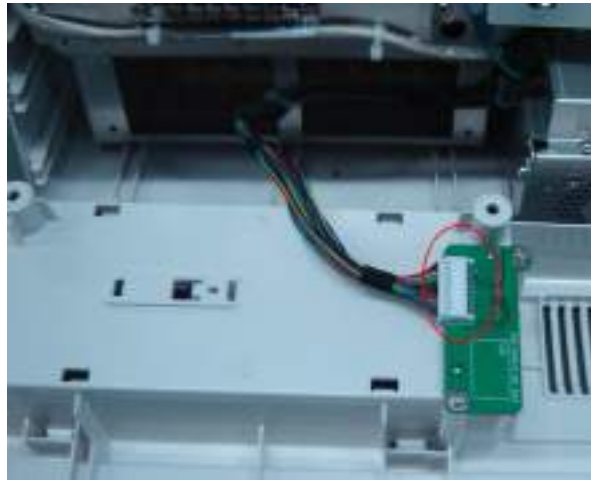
Disassembly of Rear Cover Assembly of Main Unit (2)
